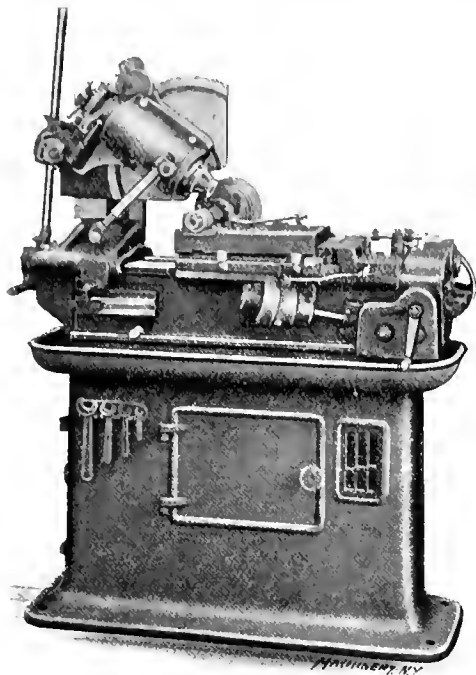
A Special Bevel Gear Cutting Machine in which provision is made for Shifting the Line of Travel of the Cutter; both Sides of the Teeth are finished automatically.
